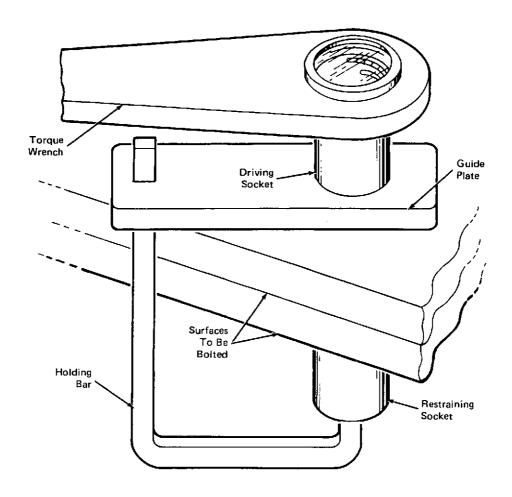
Using Threaded Fitting Assembly Tool to Torque Bolt
